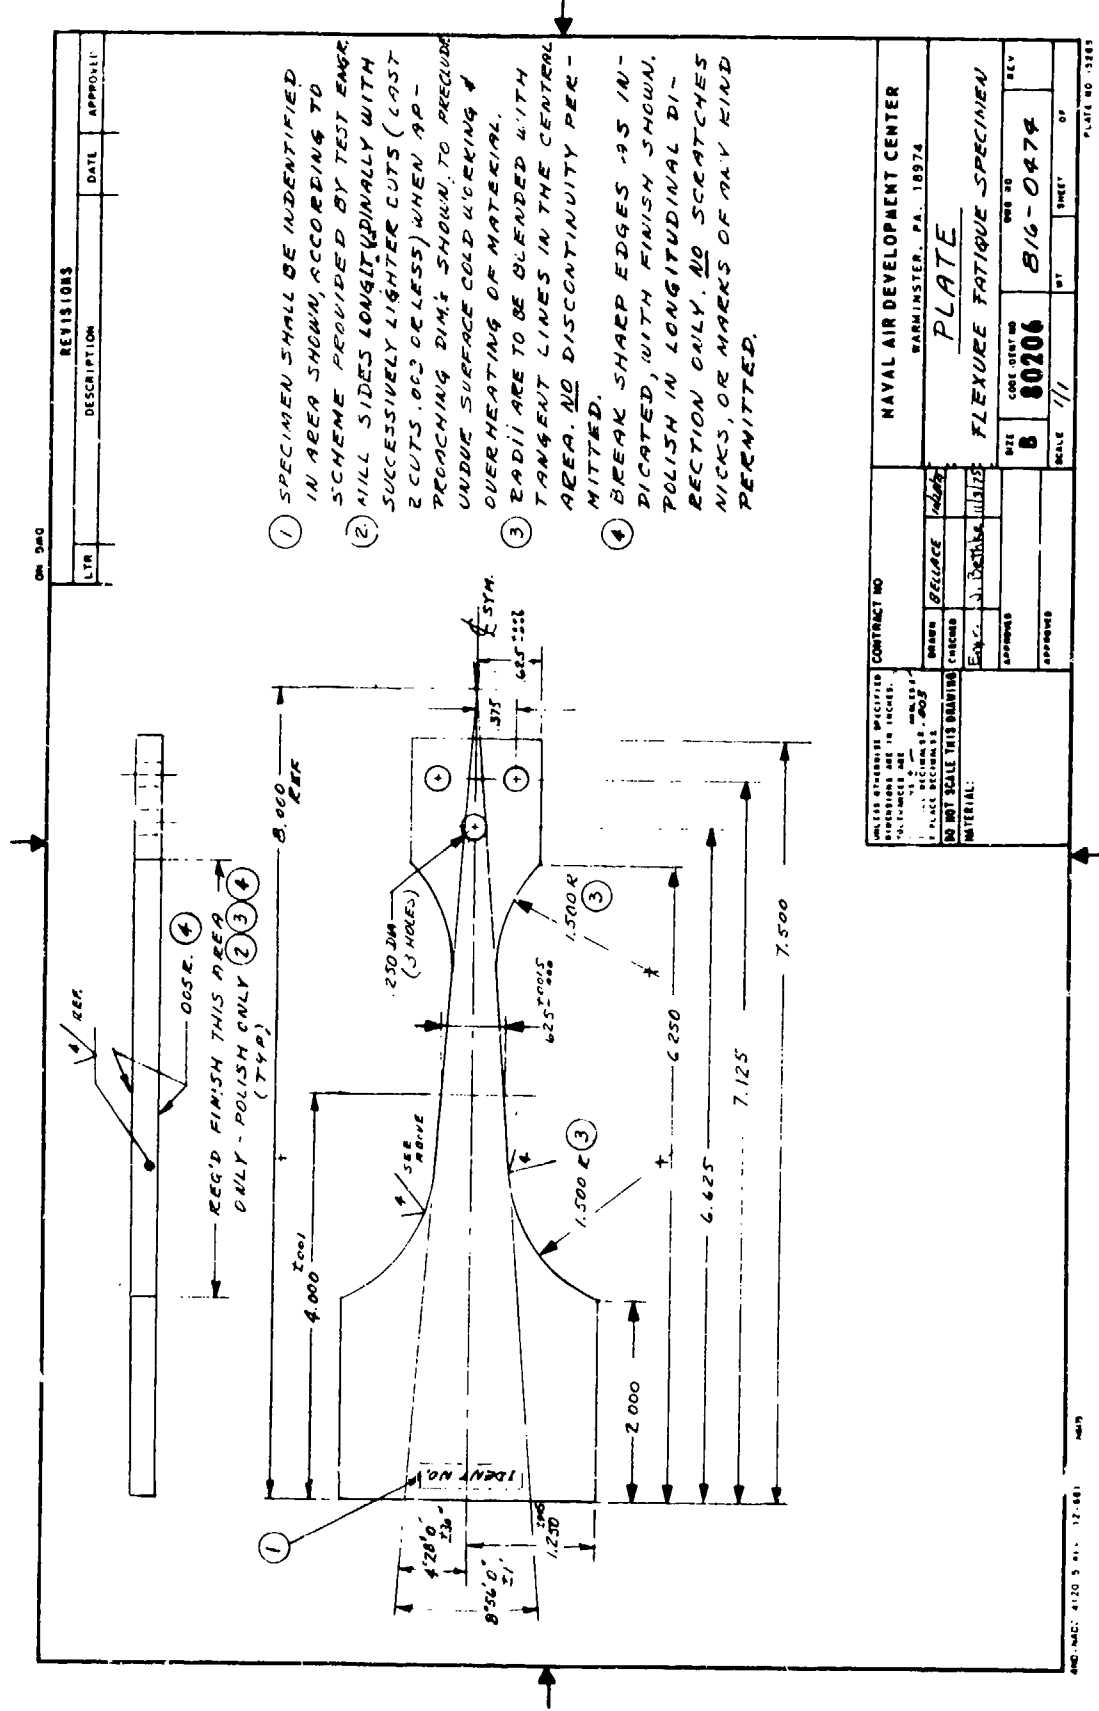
(b) - 1/4-In. (6.4mm) Thick Sheet Flexure Fatigue Test Specimen
